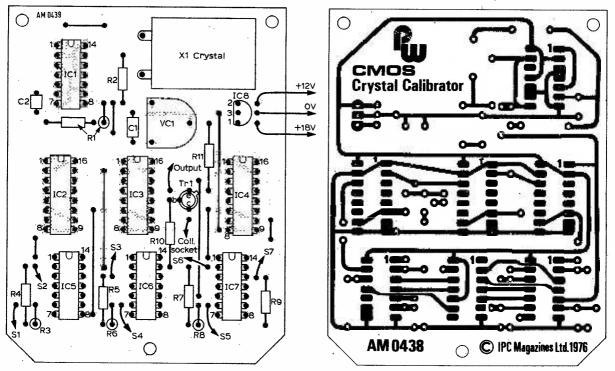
The PCB is shown here actual size together with the component layout on the board.
